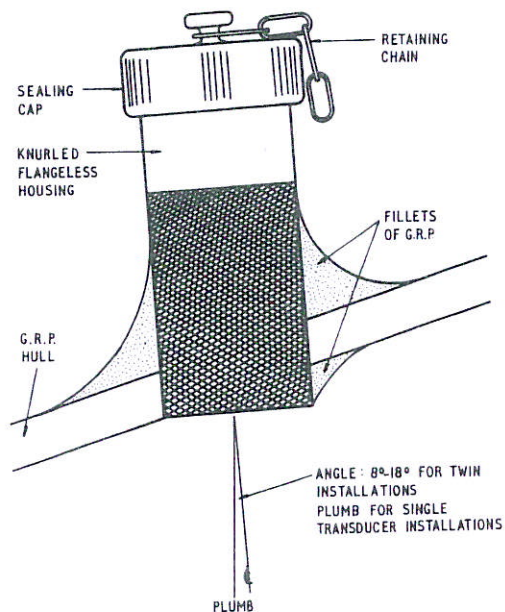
INSTALLATION OF FLANGELESS HOUSING IN GRP HULLS
